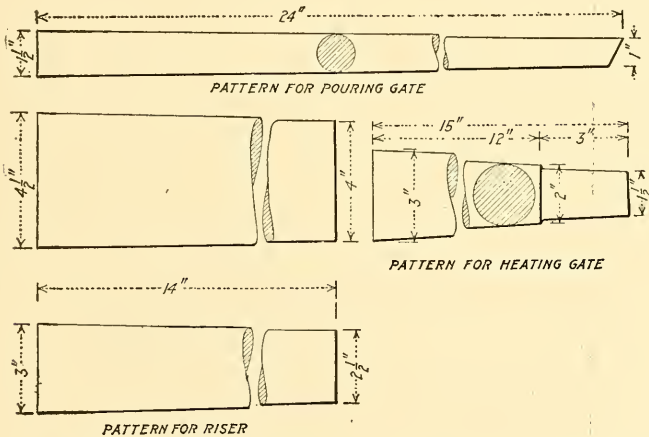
Wooden Patterns for Pouring Gate, Riser and Heating Gate of Mold. These Are Large Enough for Welds Up to 5 × 7 In. Larger Welds Require Proportionately Larger Patterns.
